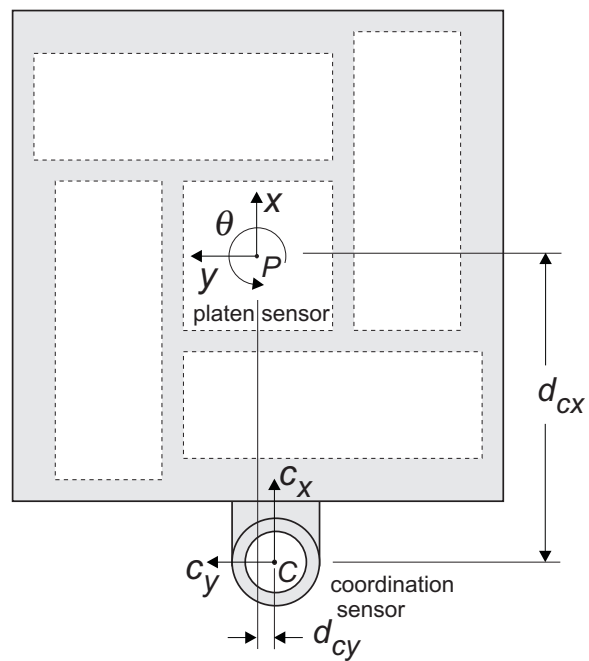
Coordinate sensor mounting parameters and sensing axes (top view)
